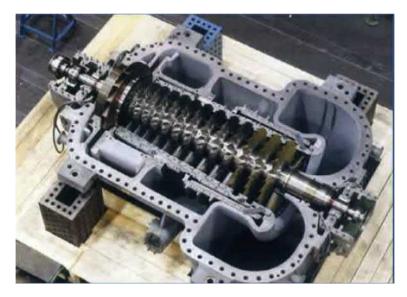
Cutaway of axial compressor showing casing and rotor.
